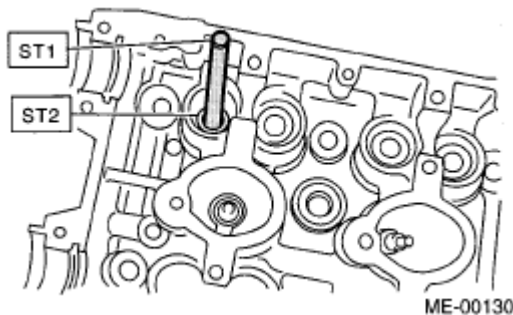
Identifying Valve Guide Remover ST1 499767200 And Valve Guide Adjuster ST2 18251Aa020
